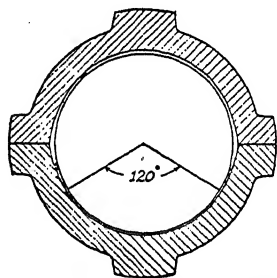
Bearing showing Sides scraped away for Oil Clearance
